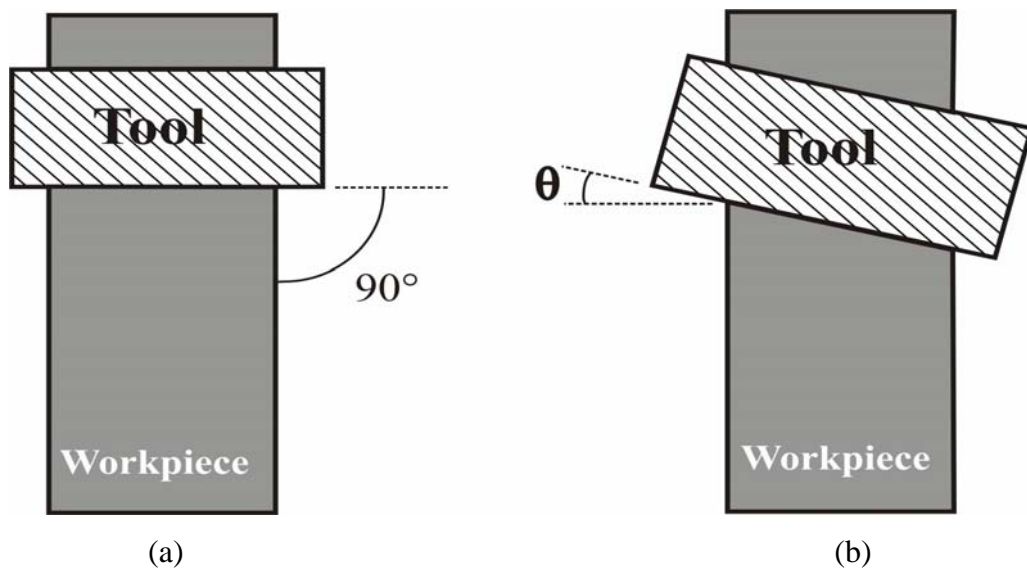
(a) Orthogonal cutting (b) Oblique cutting
